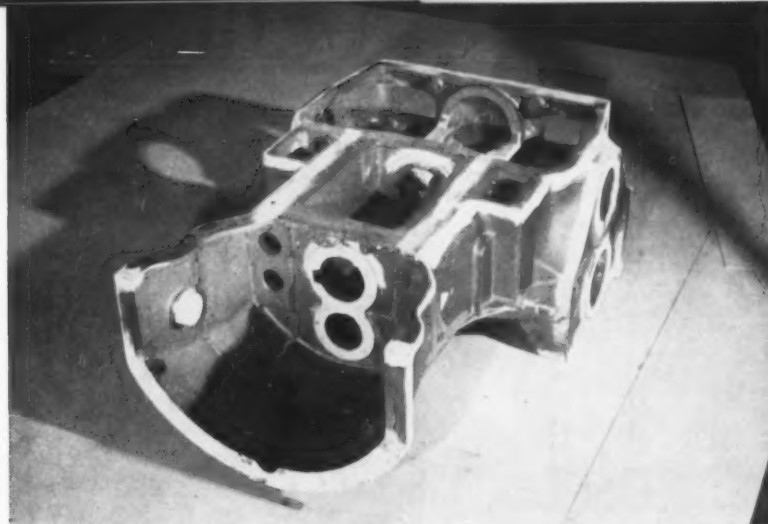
Castings designed with "U" or "V" ends will spread and this spread must be overcome. This casting opened about 3/16-in.
